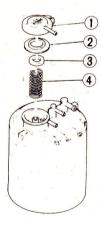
Components of the carbon canister purge control valve (Sec. 27)
